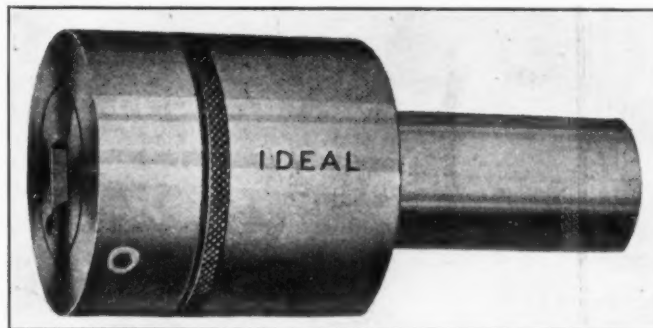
IDEAL RELEASING TAP AND DIE-HOLDER.
